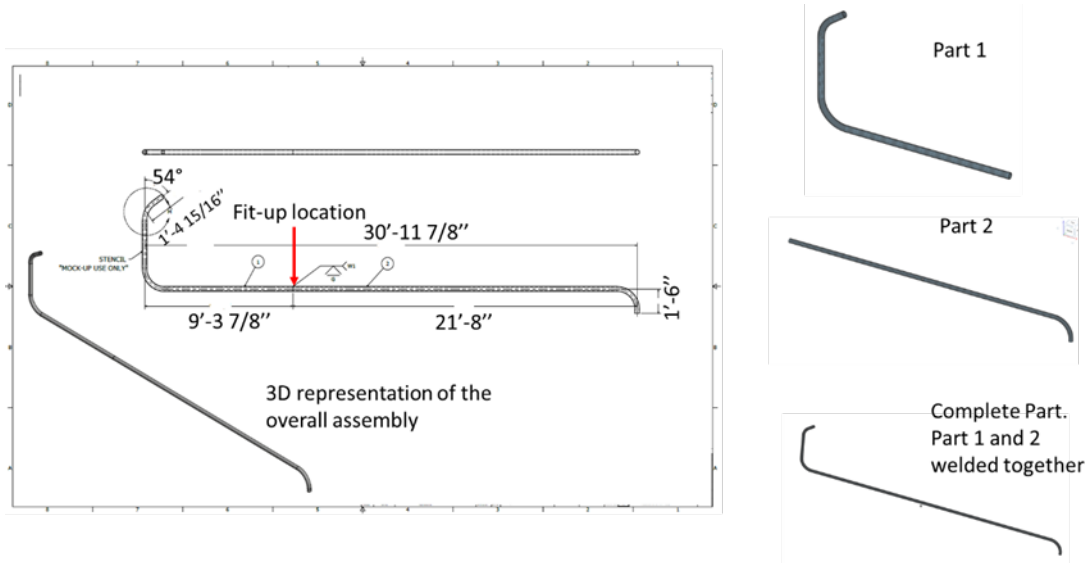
An example feeder tube comprised of two parts and one fit-up location.
